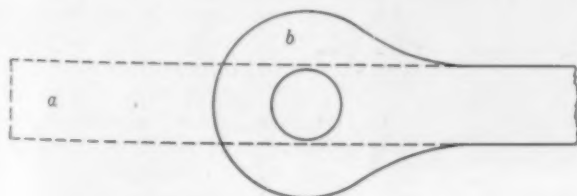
TYPICAL FORGED EYEBAR HEAD
